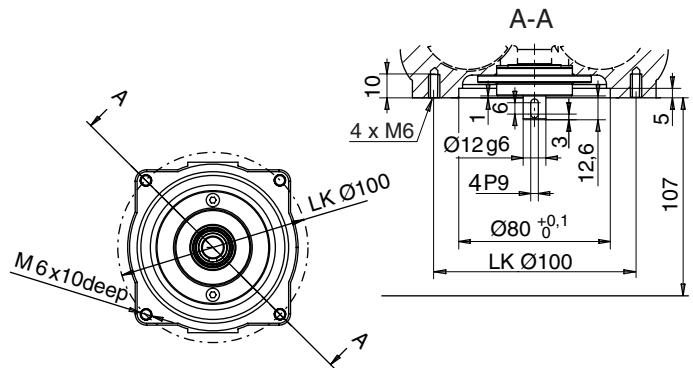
Flange dimensions type TMS00 for connection to a motor
